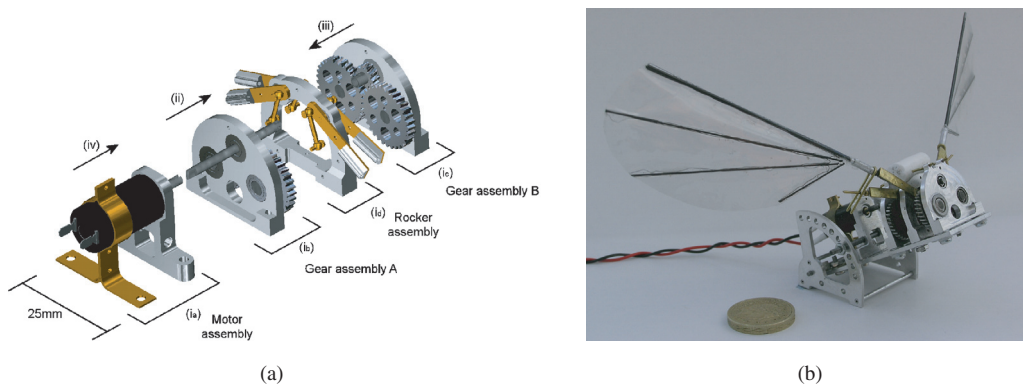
(a) CAD assembly of the PCR mechanism with assembly order annotated; (b) fully assembled PCR prototype (shown with UK one pound coin for scale).
